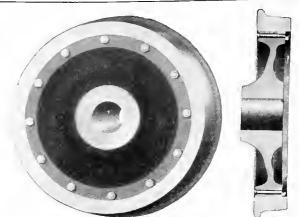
Cast Iron Plate Center, Held by Shrinkage, Double Lip Retaining Rings and Rivets.
